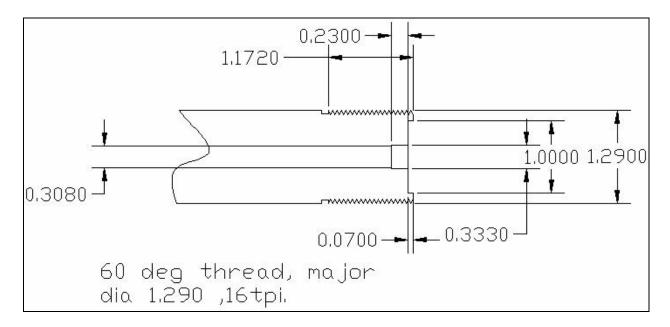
Modification to end of barrel blank to receive custom screw-on chamber.
